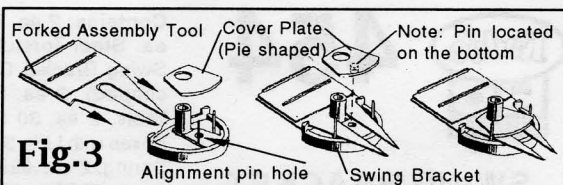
Pressing down on the Cover plate, pull Forked Assembly Tool out, allowing the Cover plate to drop into bracket. Be sure to carefully fit the alignment pin on the Cover Plate into the small hole in front of the brackets post.
